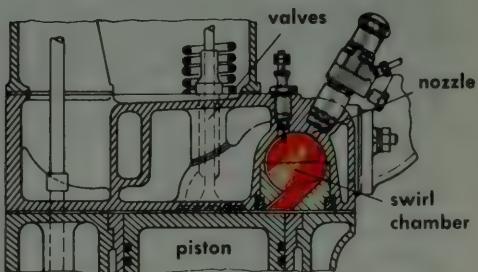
DIESEL ENGINE WITH SWIRL CHAMBER
